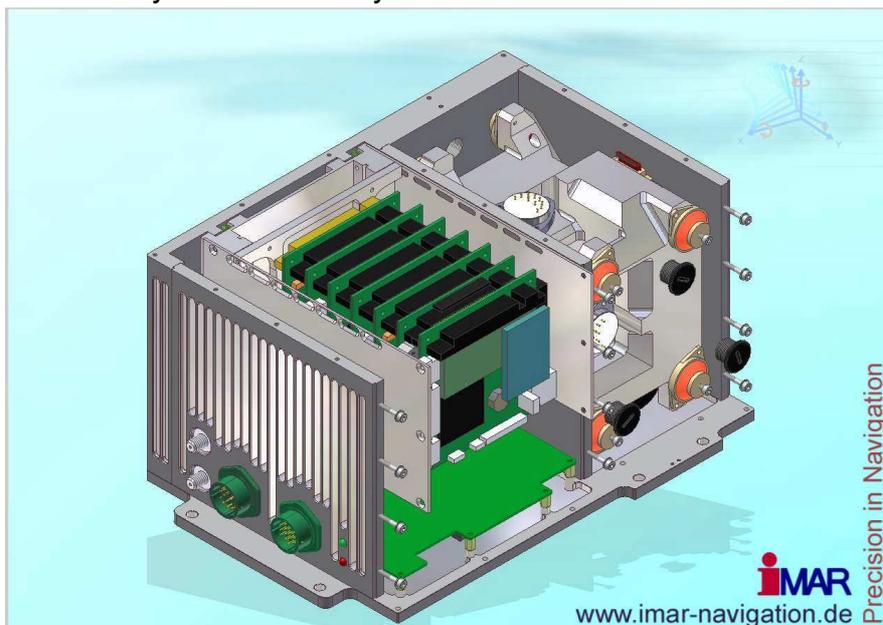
Sensor assembly with laser gyros and processor boards inside of iNAV-RQH-N
